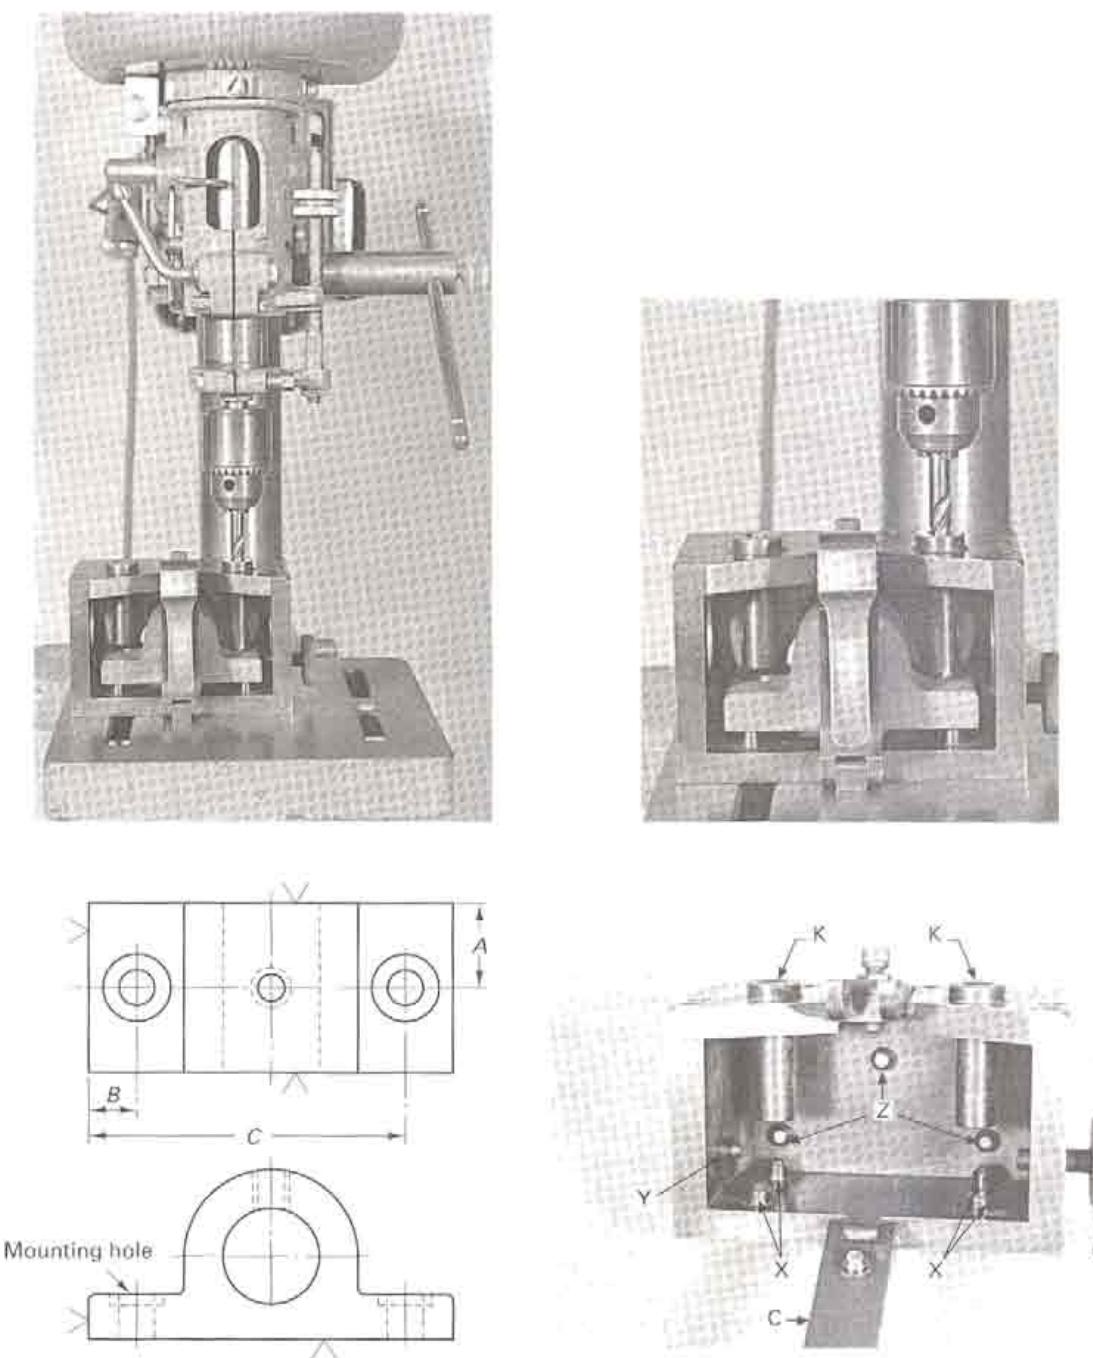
(Lower left) Part to be drilled; (lower right) box drill jig for drilling two holes; (upper left) jig in drill press; (upper right) drill being guided by drill bushing.
